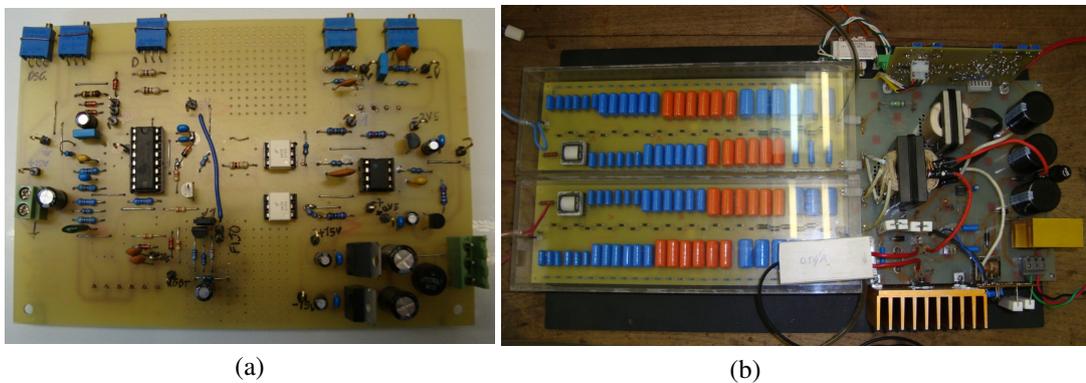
Converter and control board: (a) view of the control board and (b) top view of the converter with voltage multipliers on the left side and the primary converter on the right
